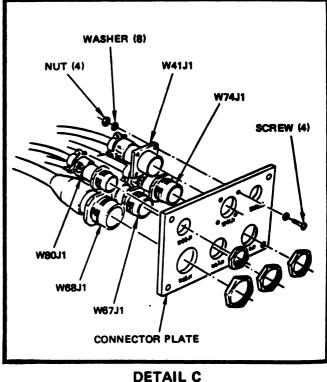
Engine Compartment Interconnecting Cable Assemblies (Sheet 2 of 2)
